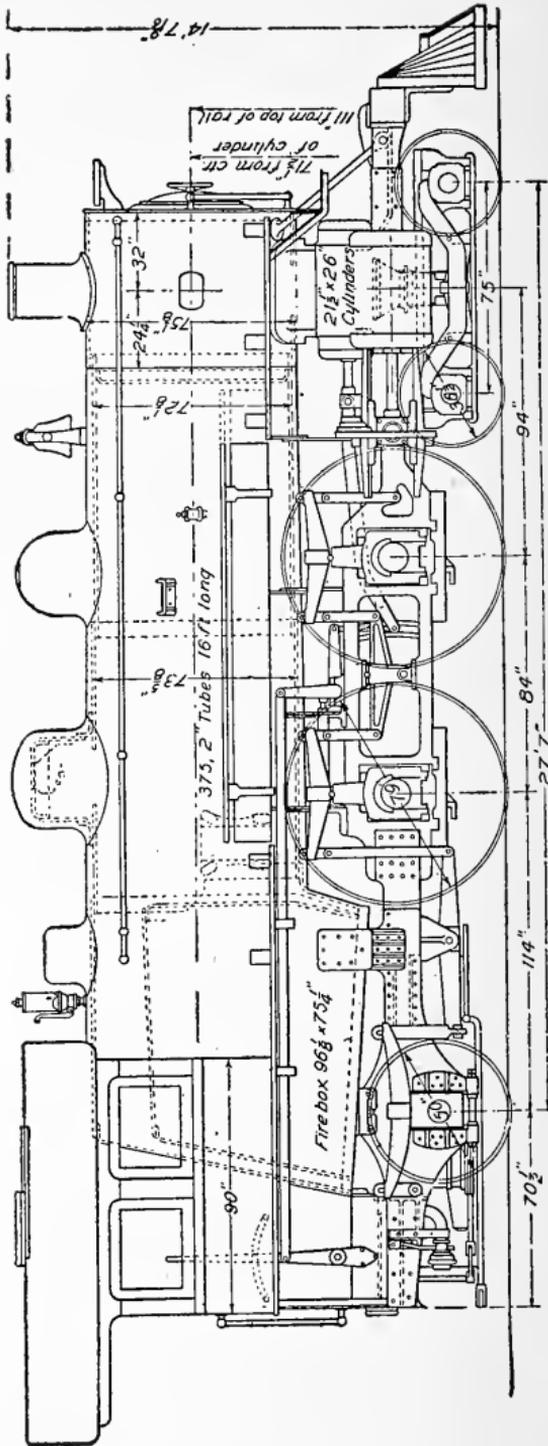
Detailed Drawing of Modern Locomotive Engine of the "Atlantic" Type
